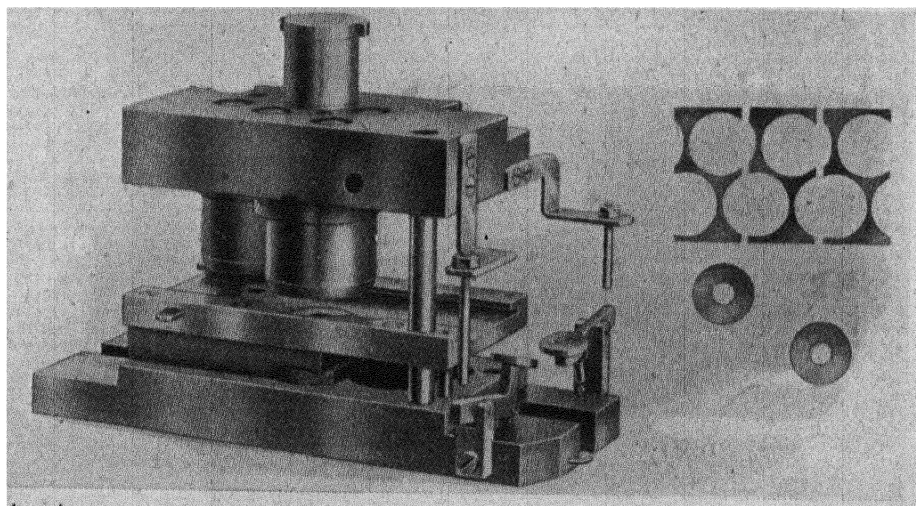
A COMBINATION TOOL AS USED IN AN INCLINABLE PRESS FOR BLANKING AND
